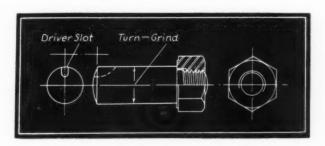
Necking may be avoided by counterboring nuts or tapped holes
